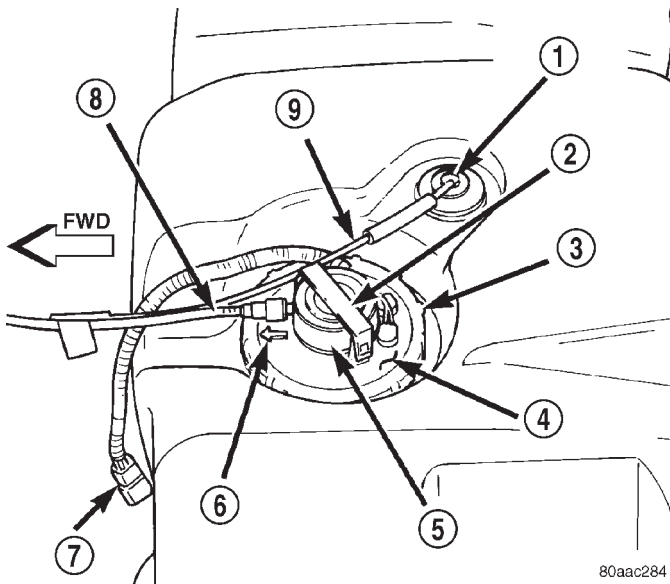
Top View of Fuel Tank and Fuel Pump Module
